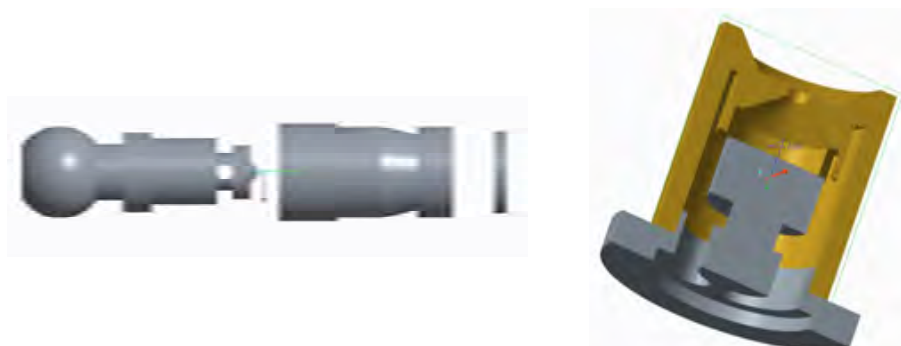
Layout of new nozzle & Sectional view of Albuz nozzle
